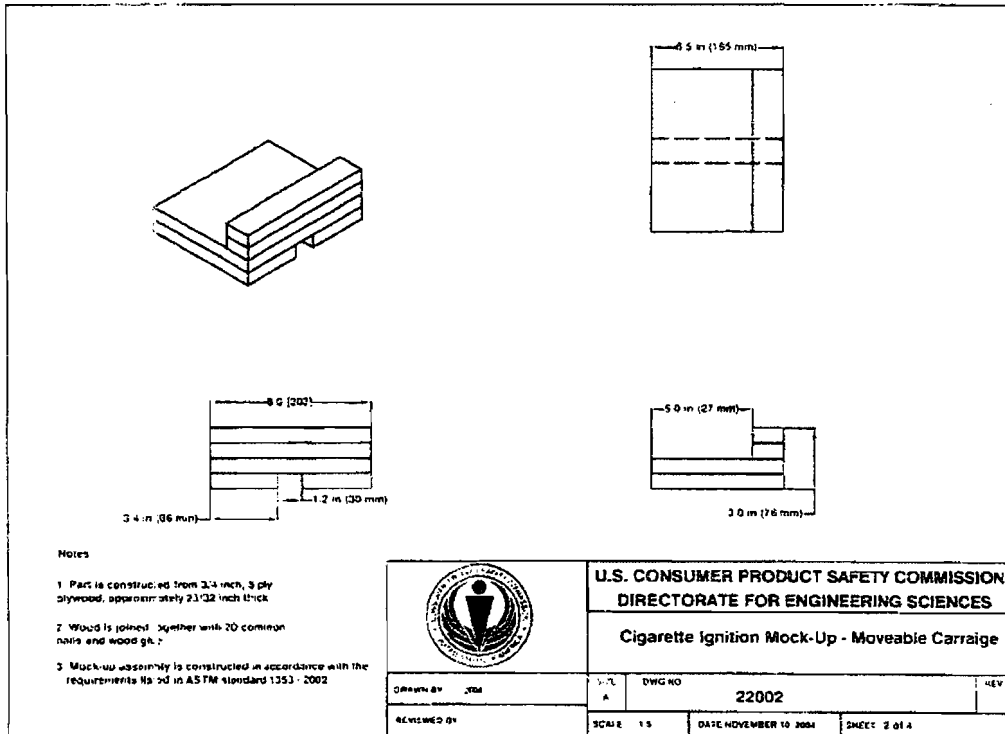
Mockup Assembly for Upholstery Cover Fabric Smoldering Ignition Resistance Test
